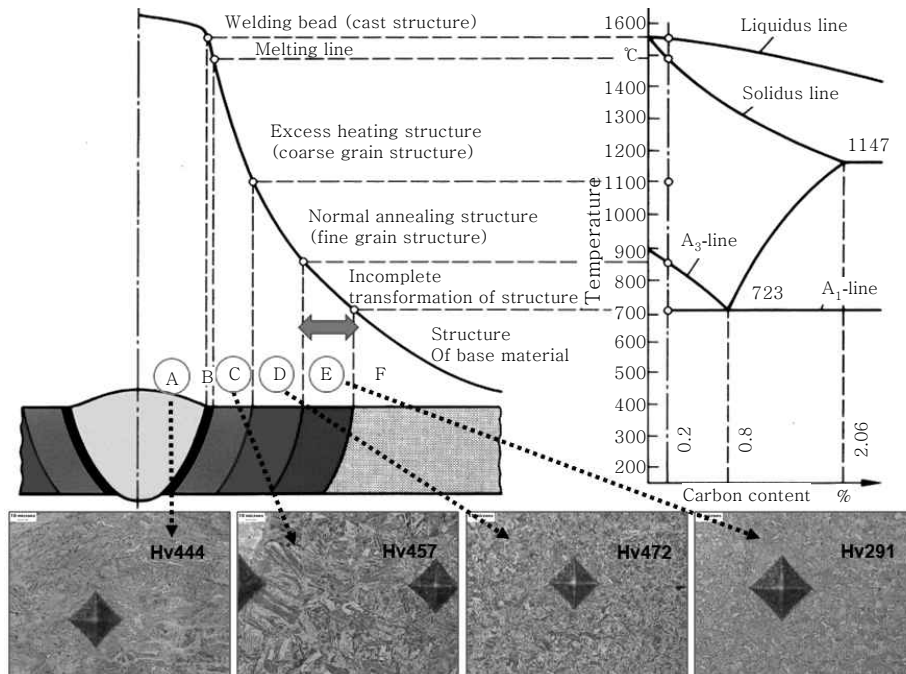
Microstructure and hardness value of weld metal and heat affected zone on hot stamping steel welded by Nd:YAG laser
